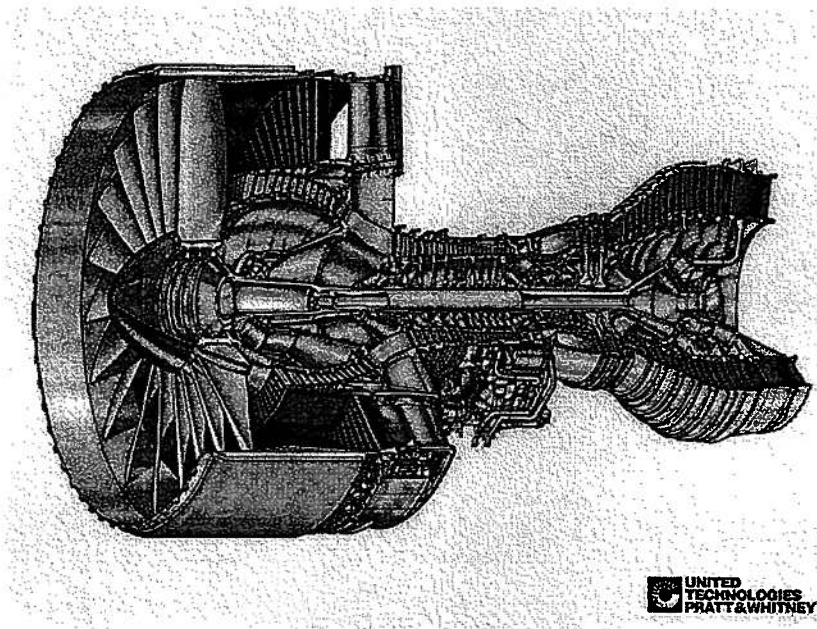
Cutaway View of the PW4000 Showing Fan, Compressor, Turbine, and Nozzle
